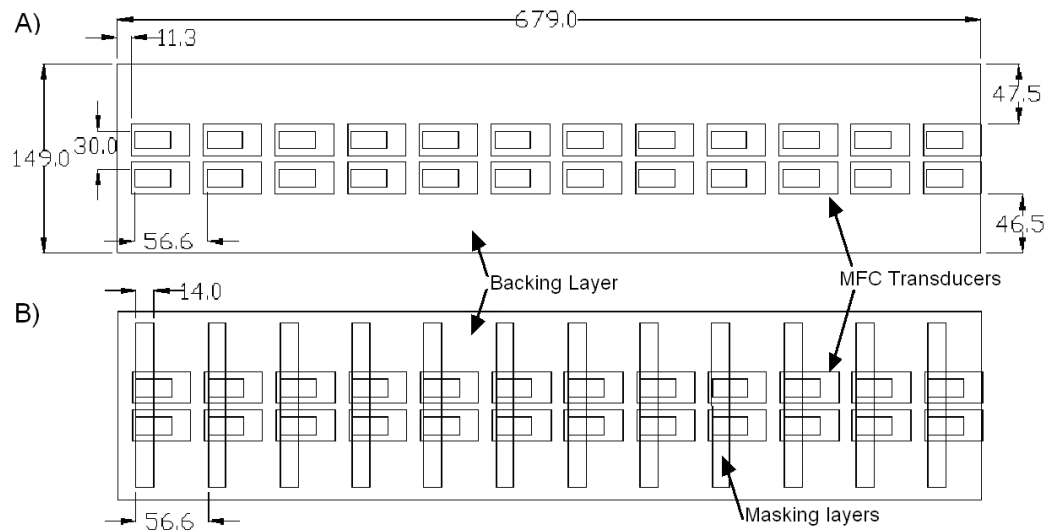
Layout of the adapted MFC transducer array for torsional waves. The two views show the tool with and without the masking layer. The MFC transducers used were the 28mm by 14mm P1 type provided by Smart Material GmbH Appendix A
